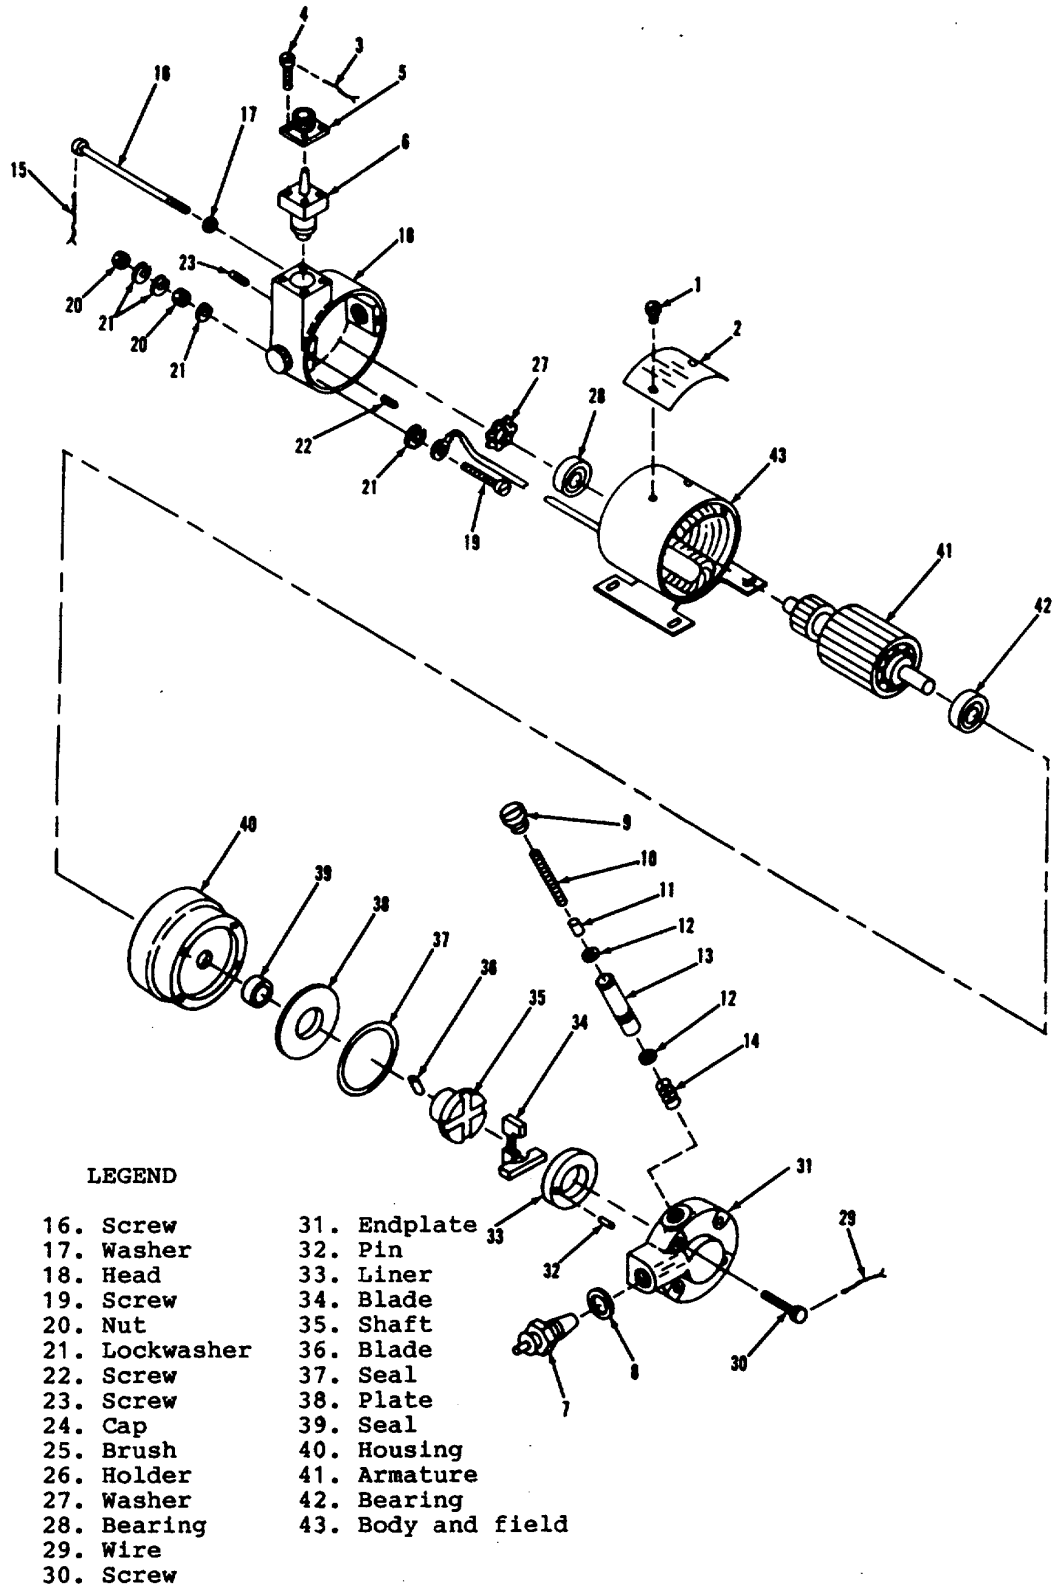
Fuel Transfer Pump Installation, Exploded View
